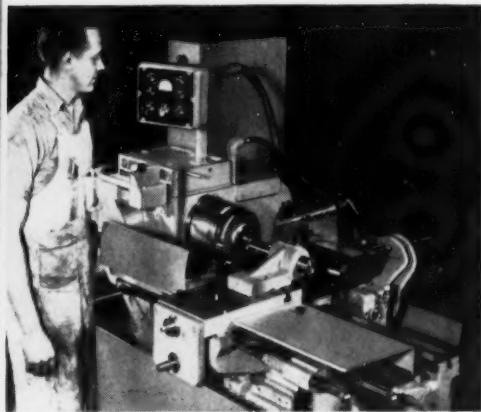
Rotary chuck on production lathe designed for boring and facing clutch plates.
